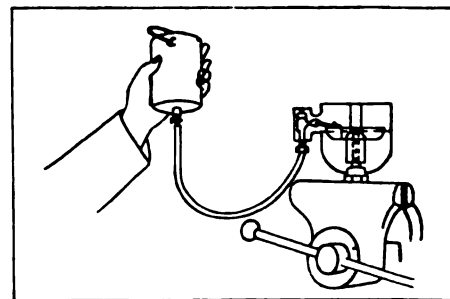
Method of Setting a Carburetor Gasoline Level When the Instrument Is Removed from the Machine.
